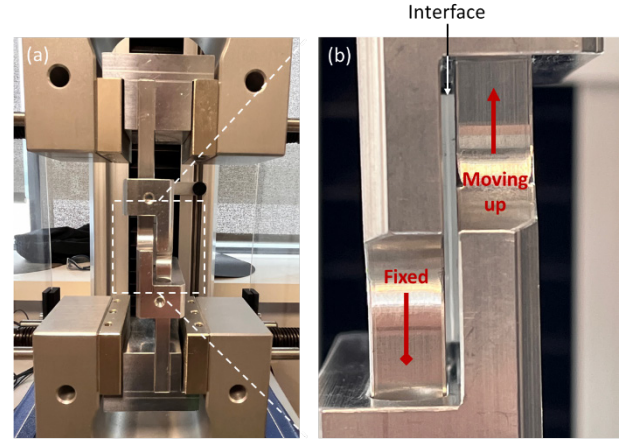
Homemade sample holder for tensile shear tests of the glass assemblies (a) view of the device, and (b) loading configuration: the left part is fixed while the right part moves upward, applying a shear force at the interface.
